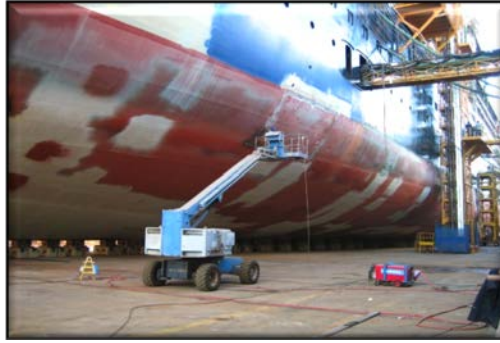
Application in situ of the Primer Coating on a tanker by spray equipment
